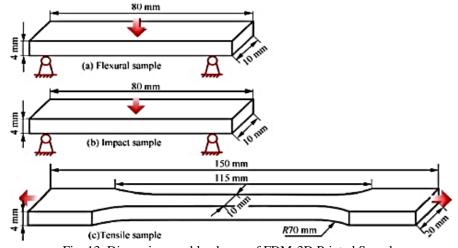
Dimensions and load case of FDM-3D Printed Samples.
